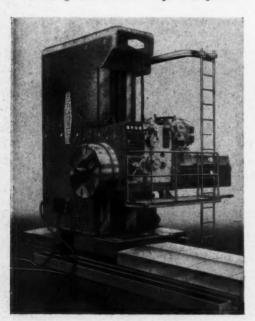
Craven H.B.F.6 floor plate-type, travellingcolumn, horizontal boring and milling machine
